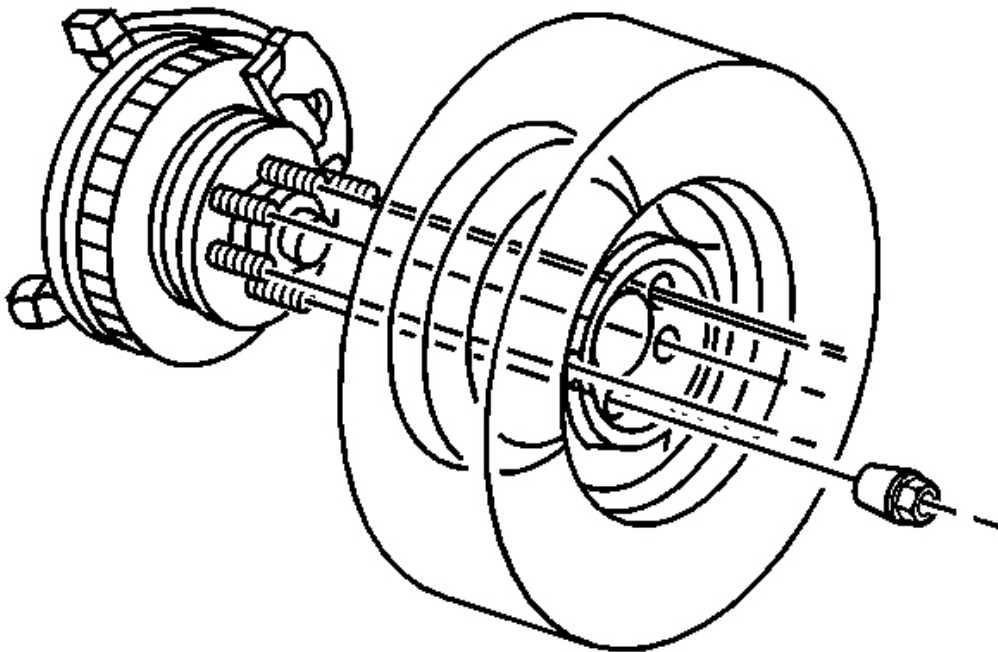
View Of Tire/Wheel Assembly, Hub Assembly & Wheel Nuts
